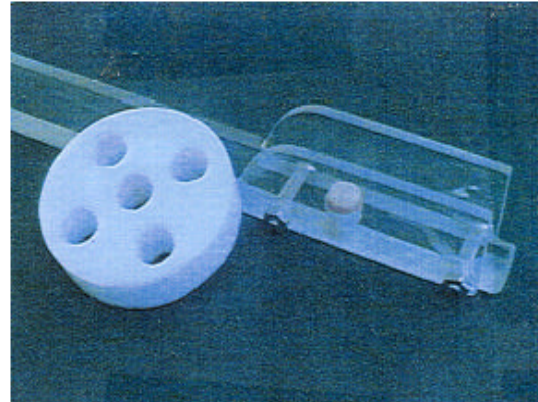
Poly carbonate mold for sample fabrication with a clip
